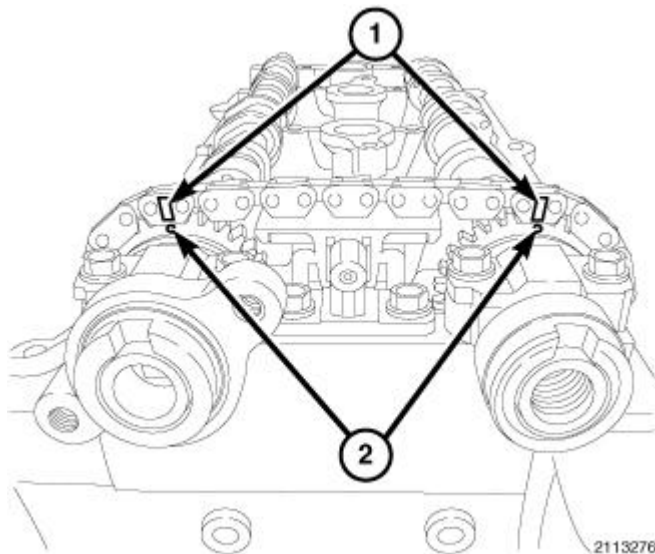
Identifying Marked Links & Timing Dot On Camshaft Sprockets
